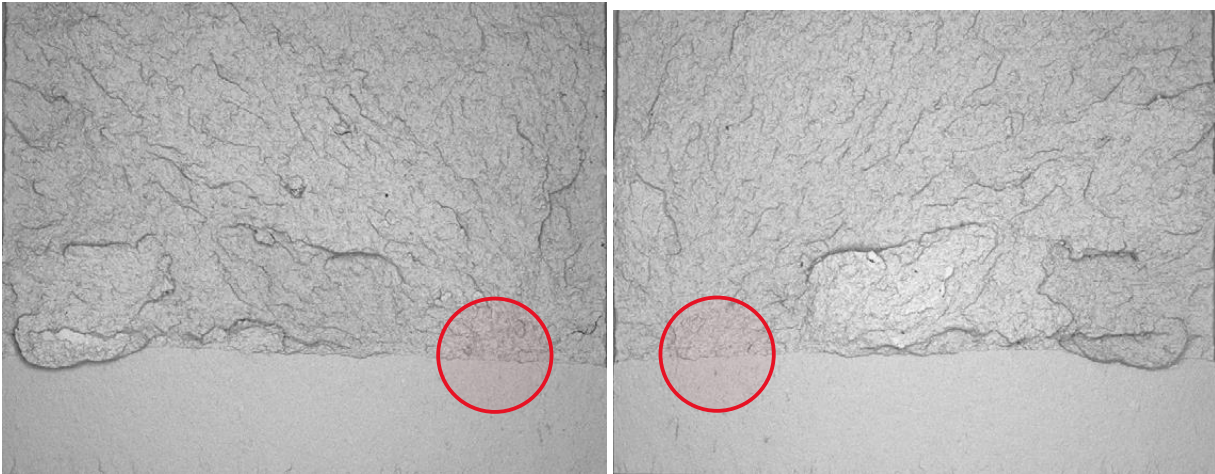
Left and right fracture surface of unirradiated 25 mm C(T) specimen B1C.5, showing predominantly cleavage fracture. The primary cleavage fracture initiation region is marked by a red circle. The test temperature was +5°C and the fracture toughness 111.8 MPa√m which explains the larger roughness of the fracture surface. Cleavage initiation occurs in a region without special features. There are isolated Al₂O₃ inclusions located in the fatigue crack growth region, but none are identified in the cleavage fracture region. Manganese sulfides present close to the end of the specimen are unrelated to cleavage fracture initiation.
